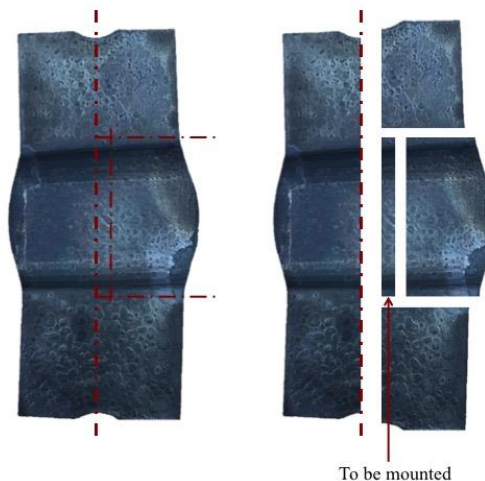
9 Illustration of sectioned PSC sample for hot mounting
